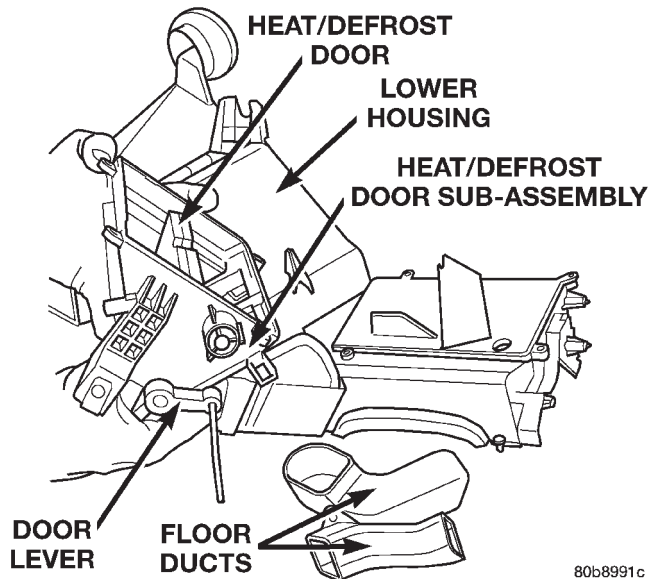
Heat/Defrost Door Sub-Assembly Removal
